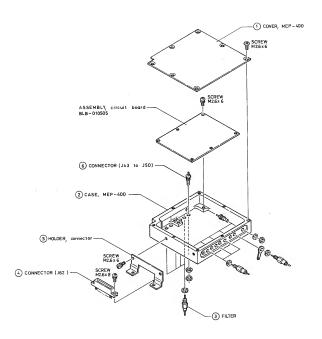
TR4172 MECHANICAL PARTS COUNTER BLOCK MEP-400 ASSEMBLY
